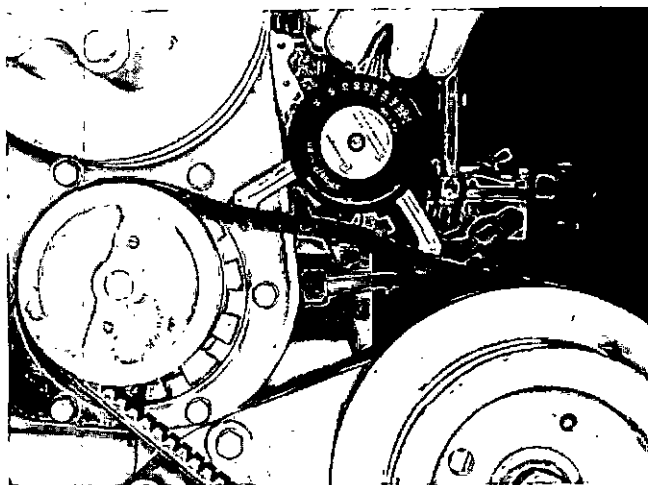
, N11969. Checking belt tension with ST-1138 Gauge
